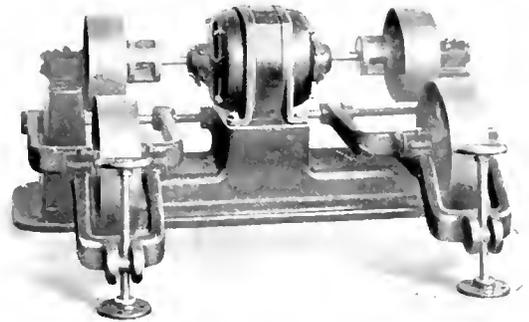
Special Countershaft Device with Motor Base and Belt Tighteners Used for Driving Two-Spindle Shapers shown in Fig. 5
